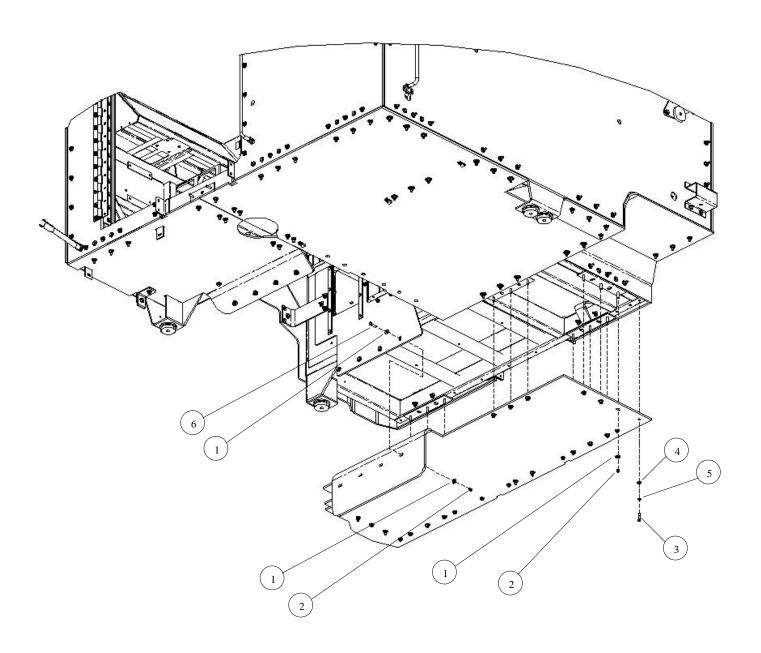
Right Mine Blast Panel Assembly Installation.
